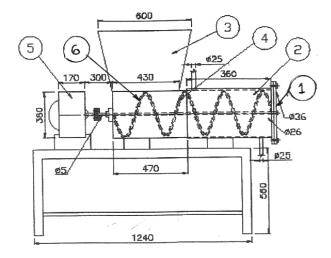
An orthographic drawing of machine 1 – die plate, 2 – heat exchanger barrel, 3 – hopper, 4 – main barrel, 5 – gear box, 6 – screw
